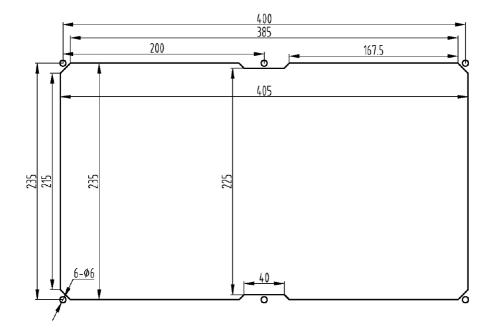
Cut out of VDP81.1FKN-C1-NN-EN
